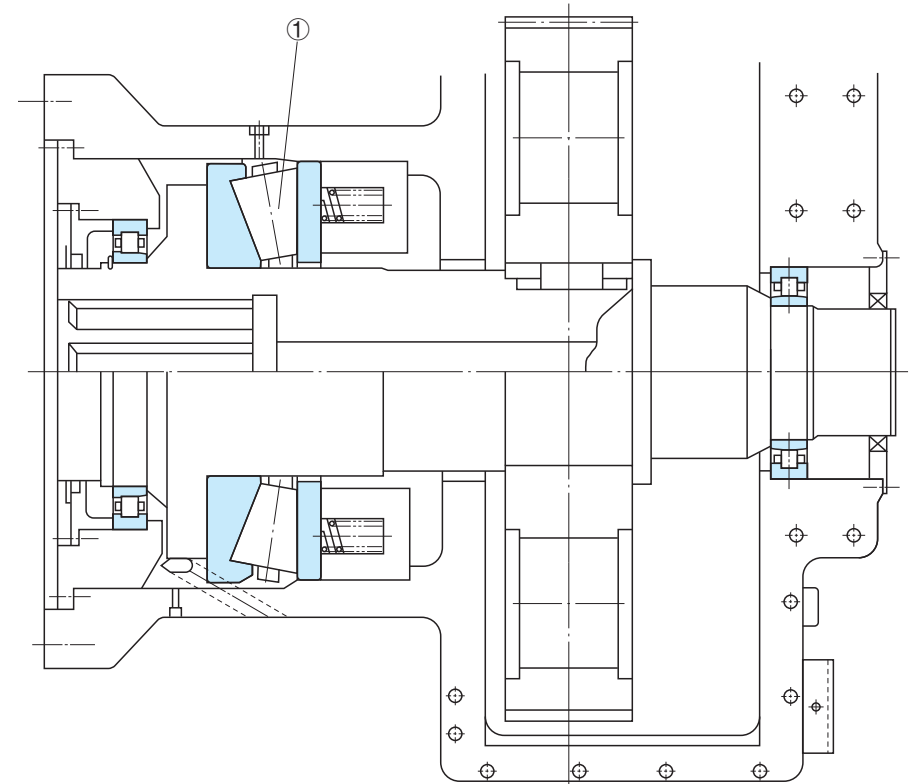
Tapered Roller Thrust Bearing in Heavy Duty Extruder
